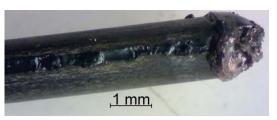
Micro welding seam at the end of a FCW diameter 1,6 mm. Residual drawing lubrication: Graphite
